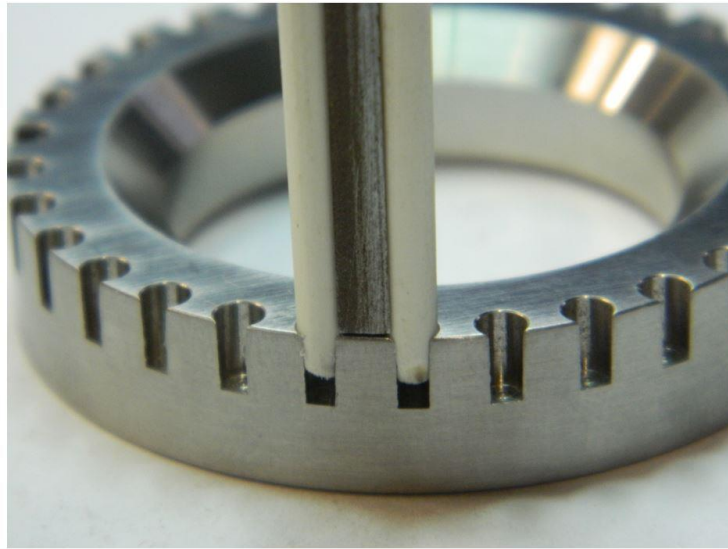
Dry fit of glass fibre rods and pole piece in PPR drive endplate
